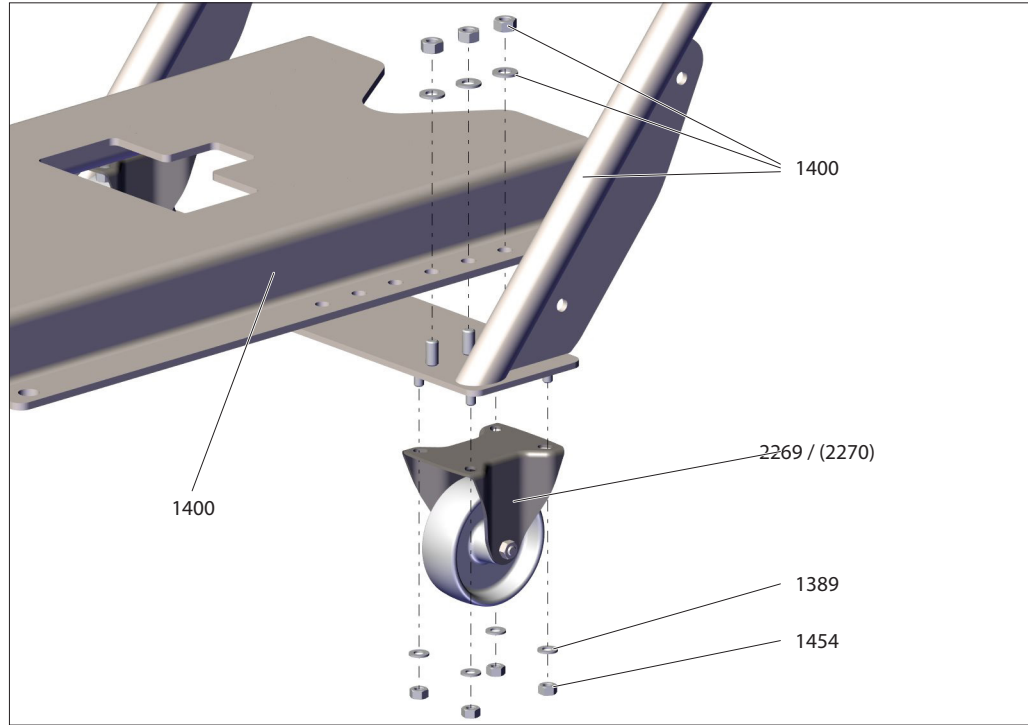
Movable baseplate details (Twin NG 70, 104 and 130): Swiveling castor or fixed castor and handle
